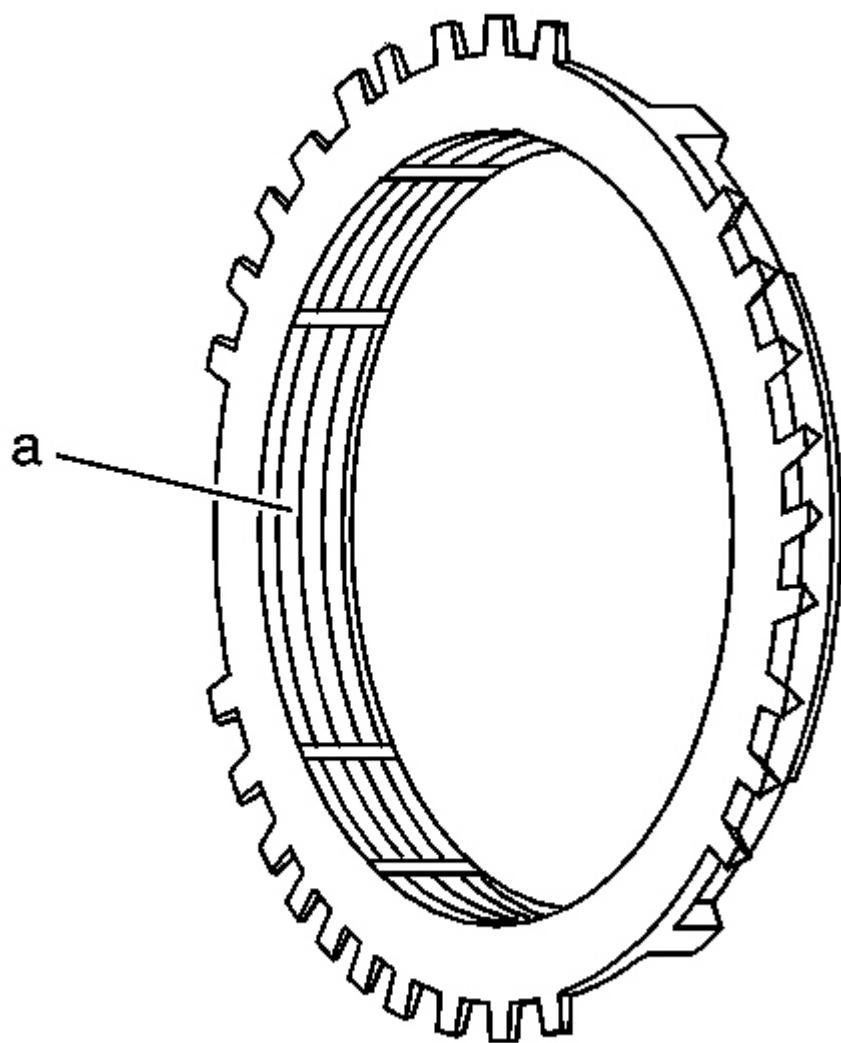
View Of Synchronizer Blocker Ring Grooves
